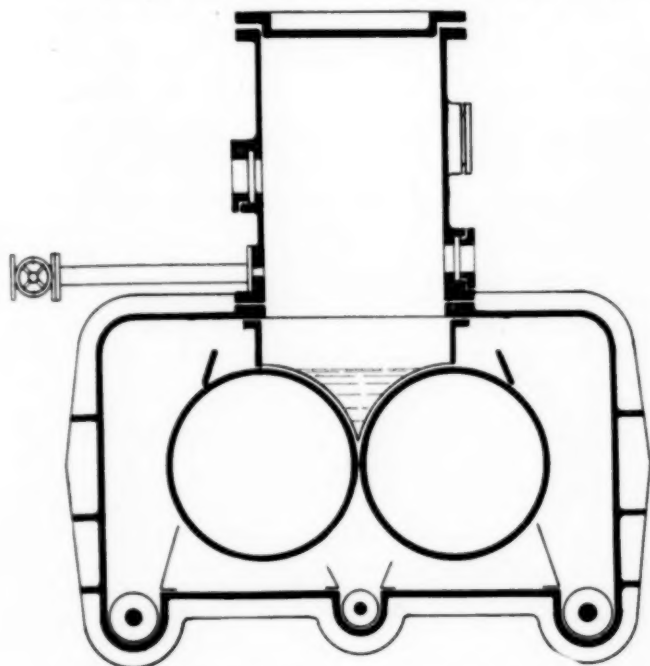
CROSS SECTION OF A PASSBURG VACUUM DOUBLE DRUM DRYER.
